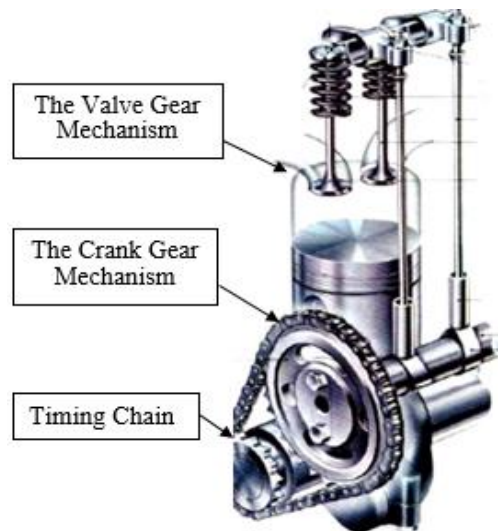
1 Crank and Valve Gear Mechanisms of a Reciprocating IC Engine [37]
